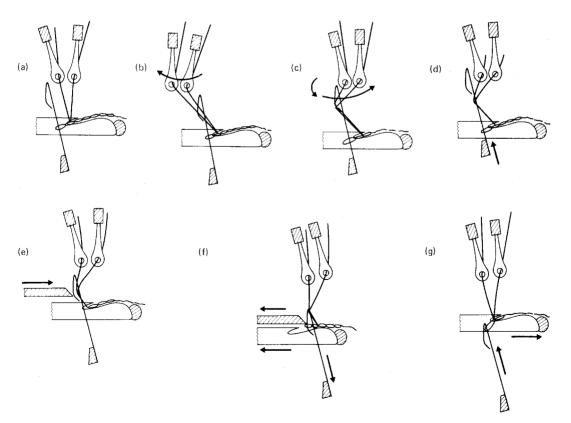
Knitting cycle of a bearded needle tricot machine.
